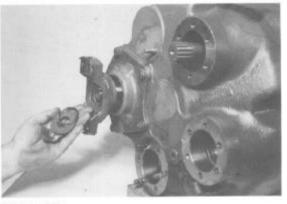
Remove flange nut, washer, "O" ring and flange from output shaft.
